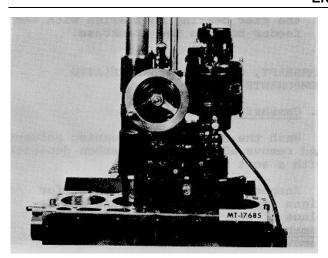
Reboring Cylinder Using SE-13 Boring Machine
